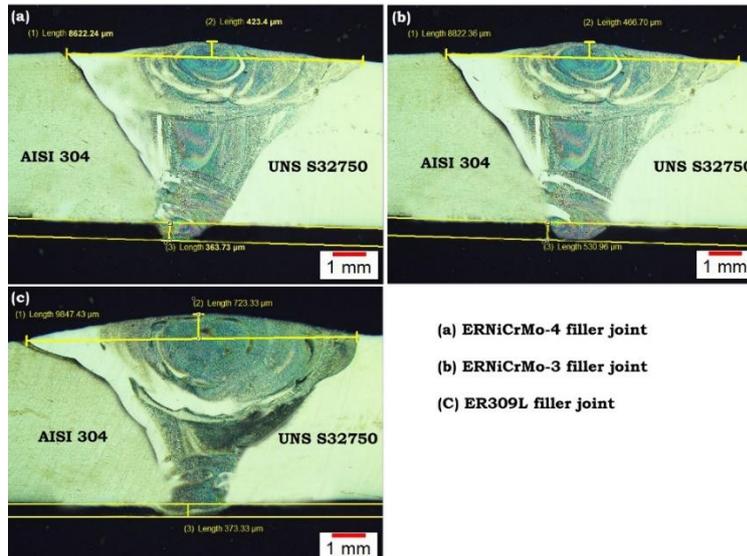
Macrostructures of dissimilar UNS S32750 and AISI 304 weldments prepared with three alternative filler wires.
